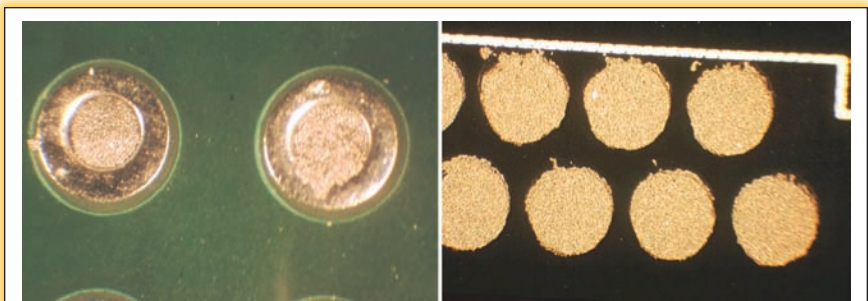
Through-holes filled using a double print stroke during paste application (left). Round paste deposits that have been over printed (right), viewed from the base of the board prior to inserting the component leads and showing 100% fill. The round paste deposits show evidence of paste squeeze-out under the stencil due to the double print stroke.
